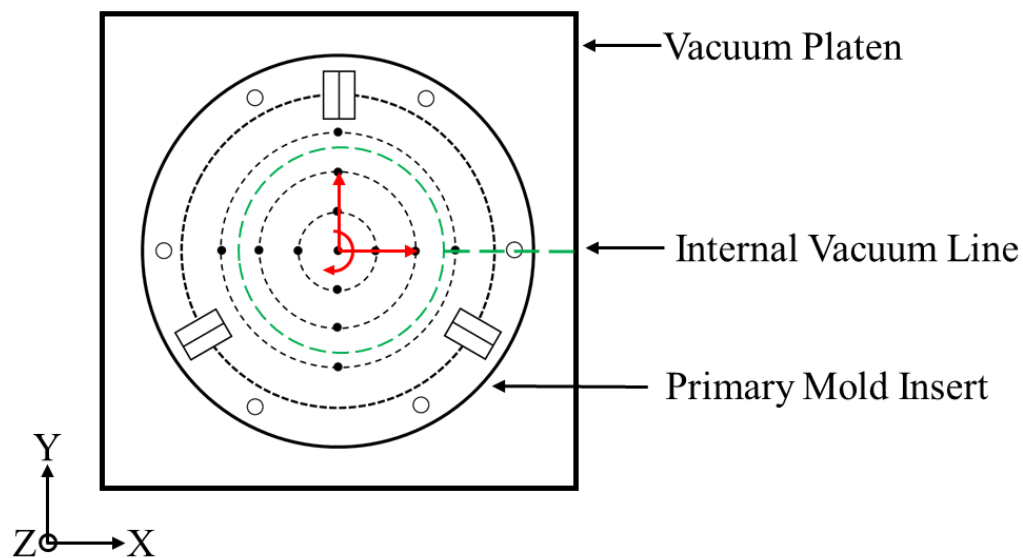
Diagram of vacuum-mounted primary mold insert that could translate along the X- and Y-Axis and rotate about the Z-Axis.
